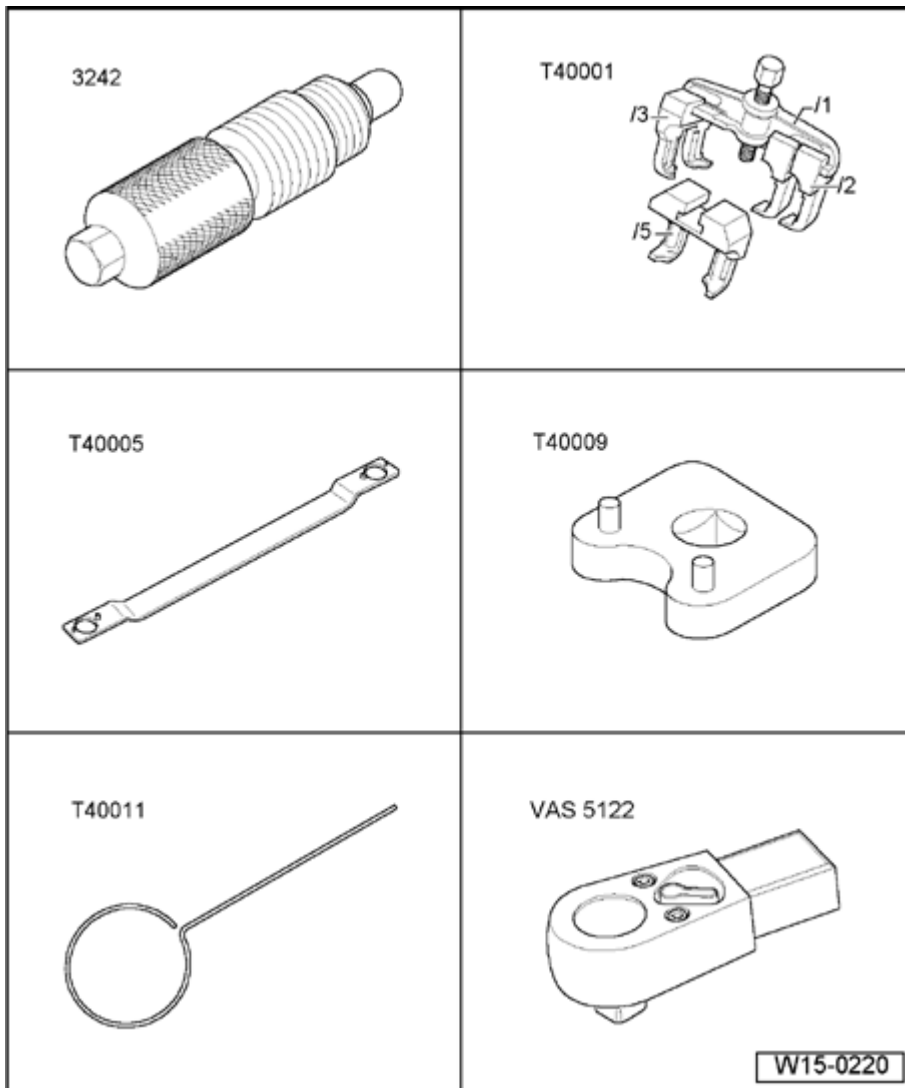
Identifying Special Tools - Toothed Belt, Removing And Installing
